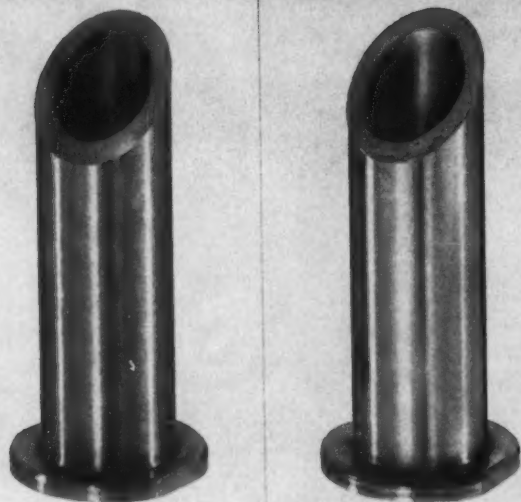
Typical screw-machine part (left) having a surface roughness of 35 micro-inches is compared with an identical work-piece (right) that has been barrel-finished to improve surface, round edges, and blend tool marks.
